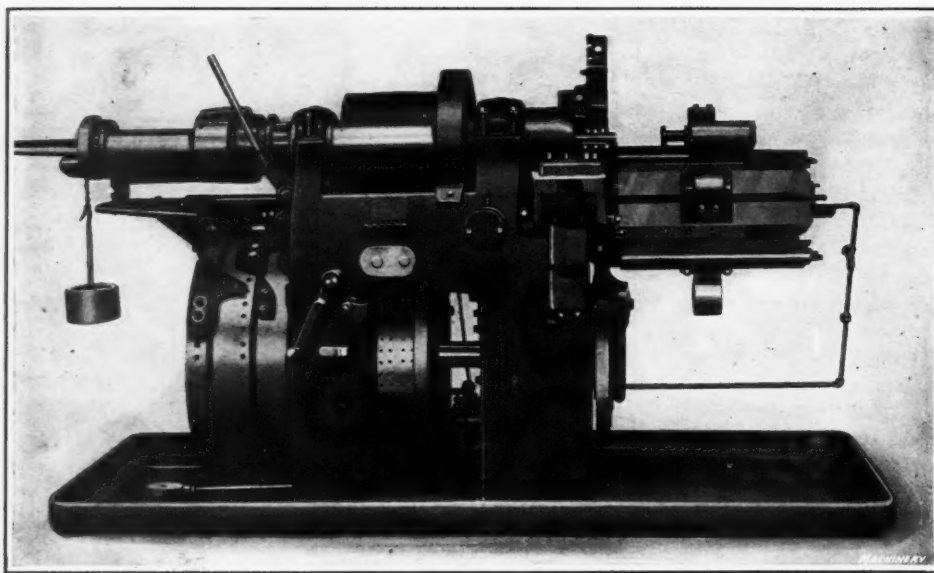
Front View of Gridley Single-spindle Automatic Turret Lathe
